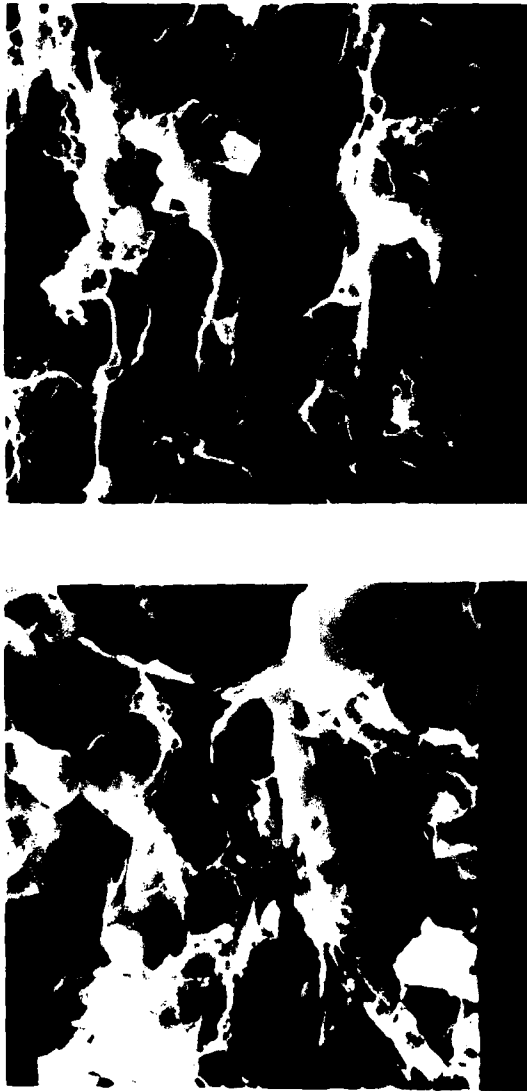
Higher Magnification SEM Fractographs Obtained from the Flat Fracture Areas of TL I/M (Left) and P/M (Right) Slow-Bend Charpy Toughness Test Specimens.
